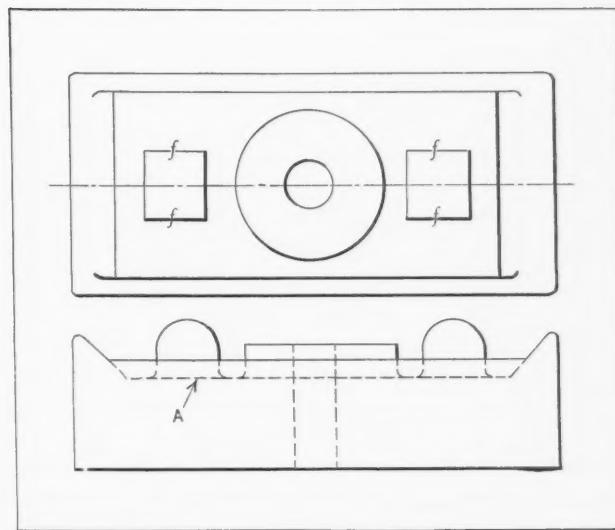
Work on which Four Faces are Milled Simultaneously by Means of the Fixture Shown in Fig. 2
